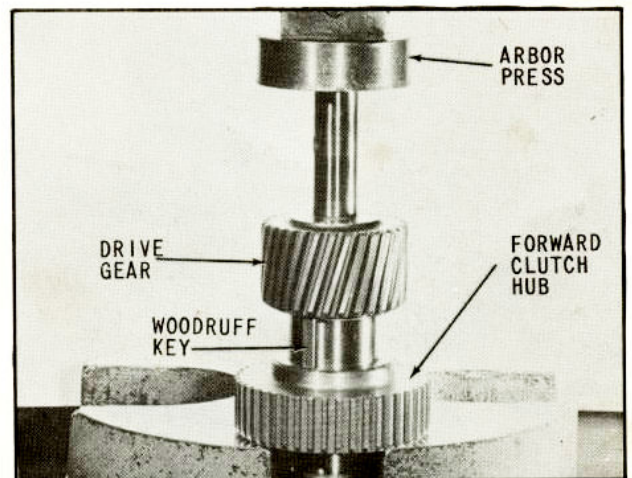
Pressing Drive Gear into Forward Clutch Hub
